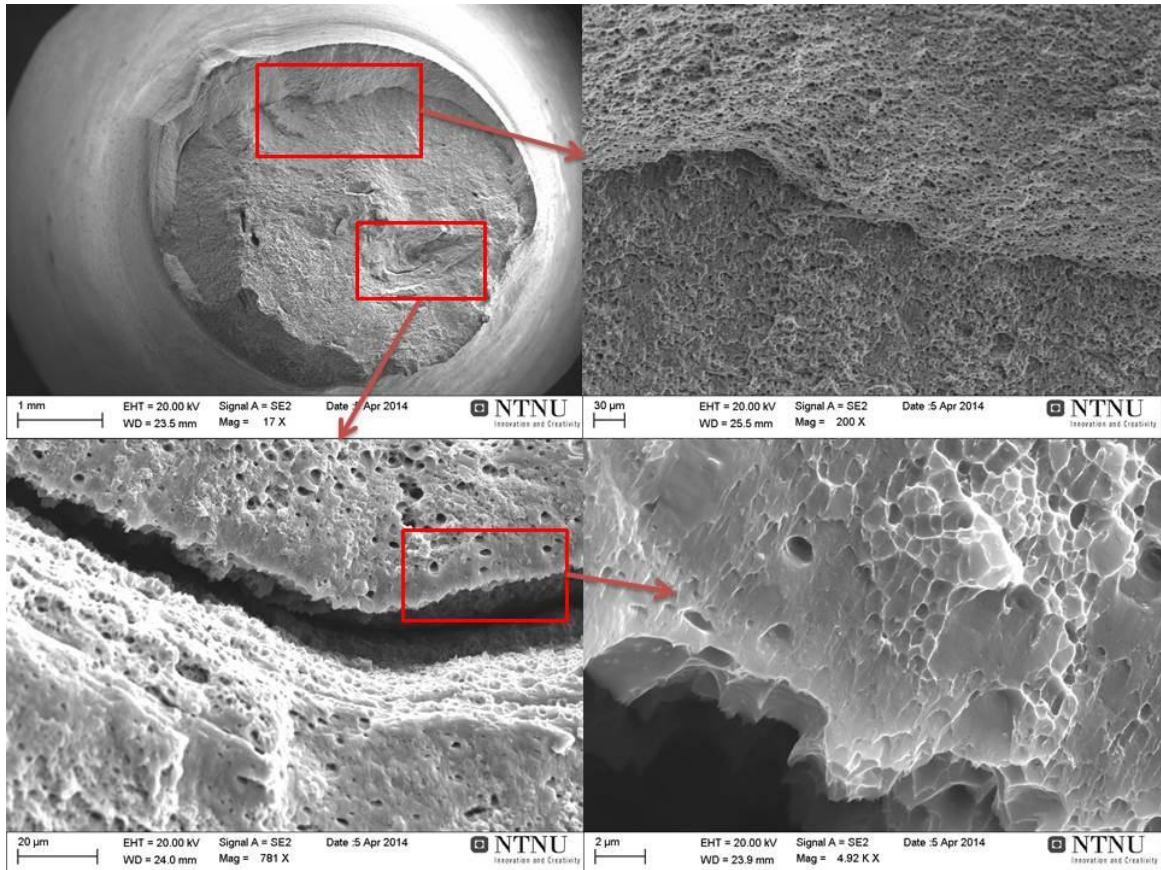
Fractography of RSA6061 T6, SSHT at 520°C.
